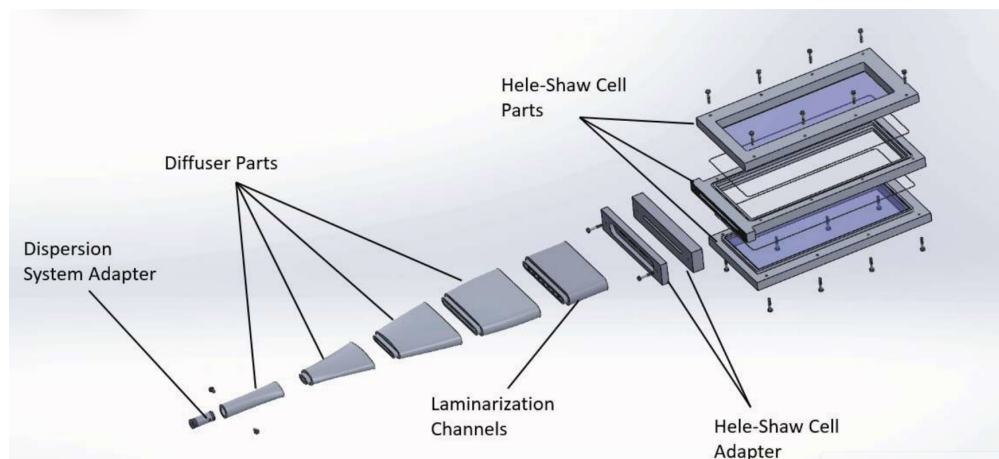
Exploded view of the diffuser, adapter, and cell [7].
